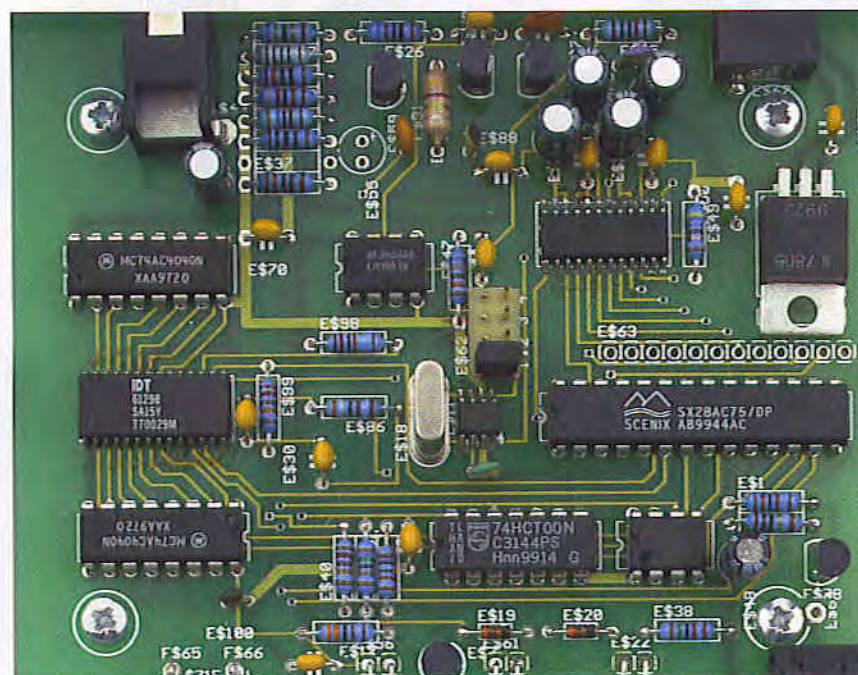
Component mounting plan for the double-sided printed circuit board. The trickiest character to deal with is the SRAM in a 28-pin SOJ package.
